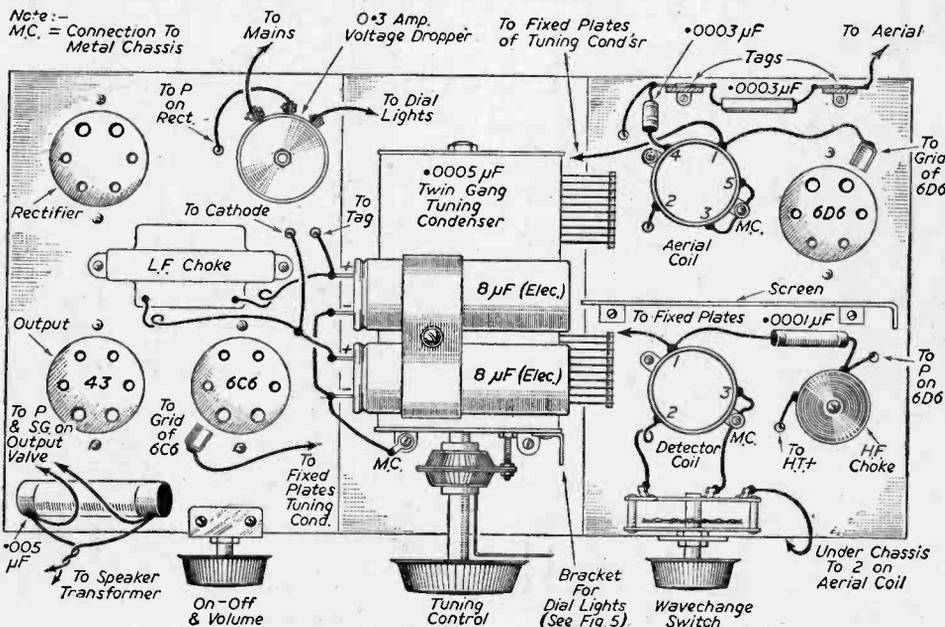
Above chassis view, showing layout and part of the wiring.
